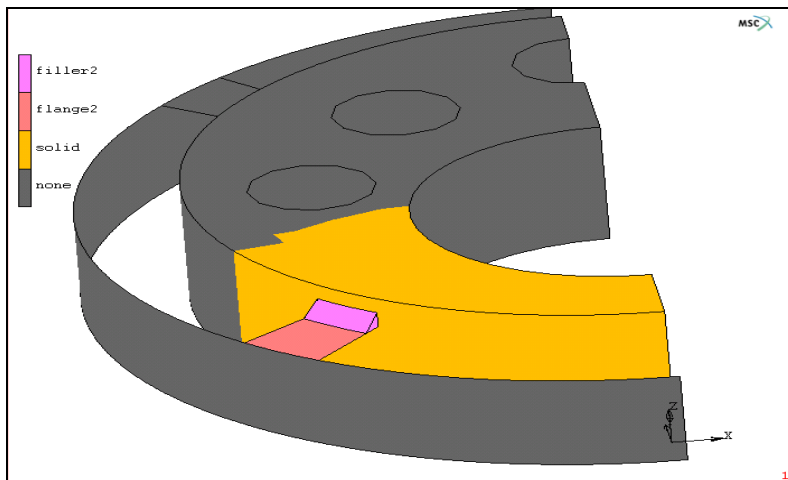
Contact Body Definition for Weld Filler 2
